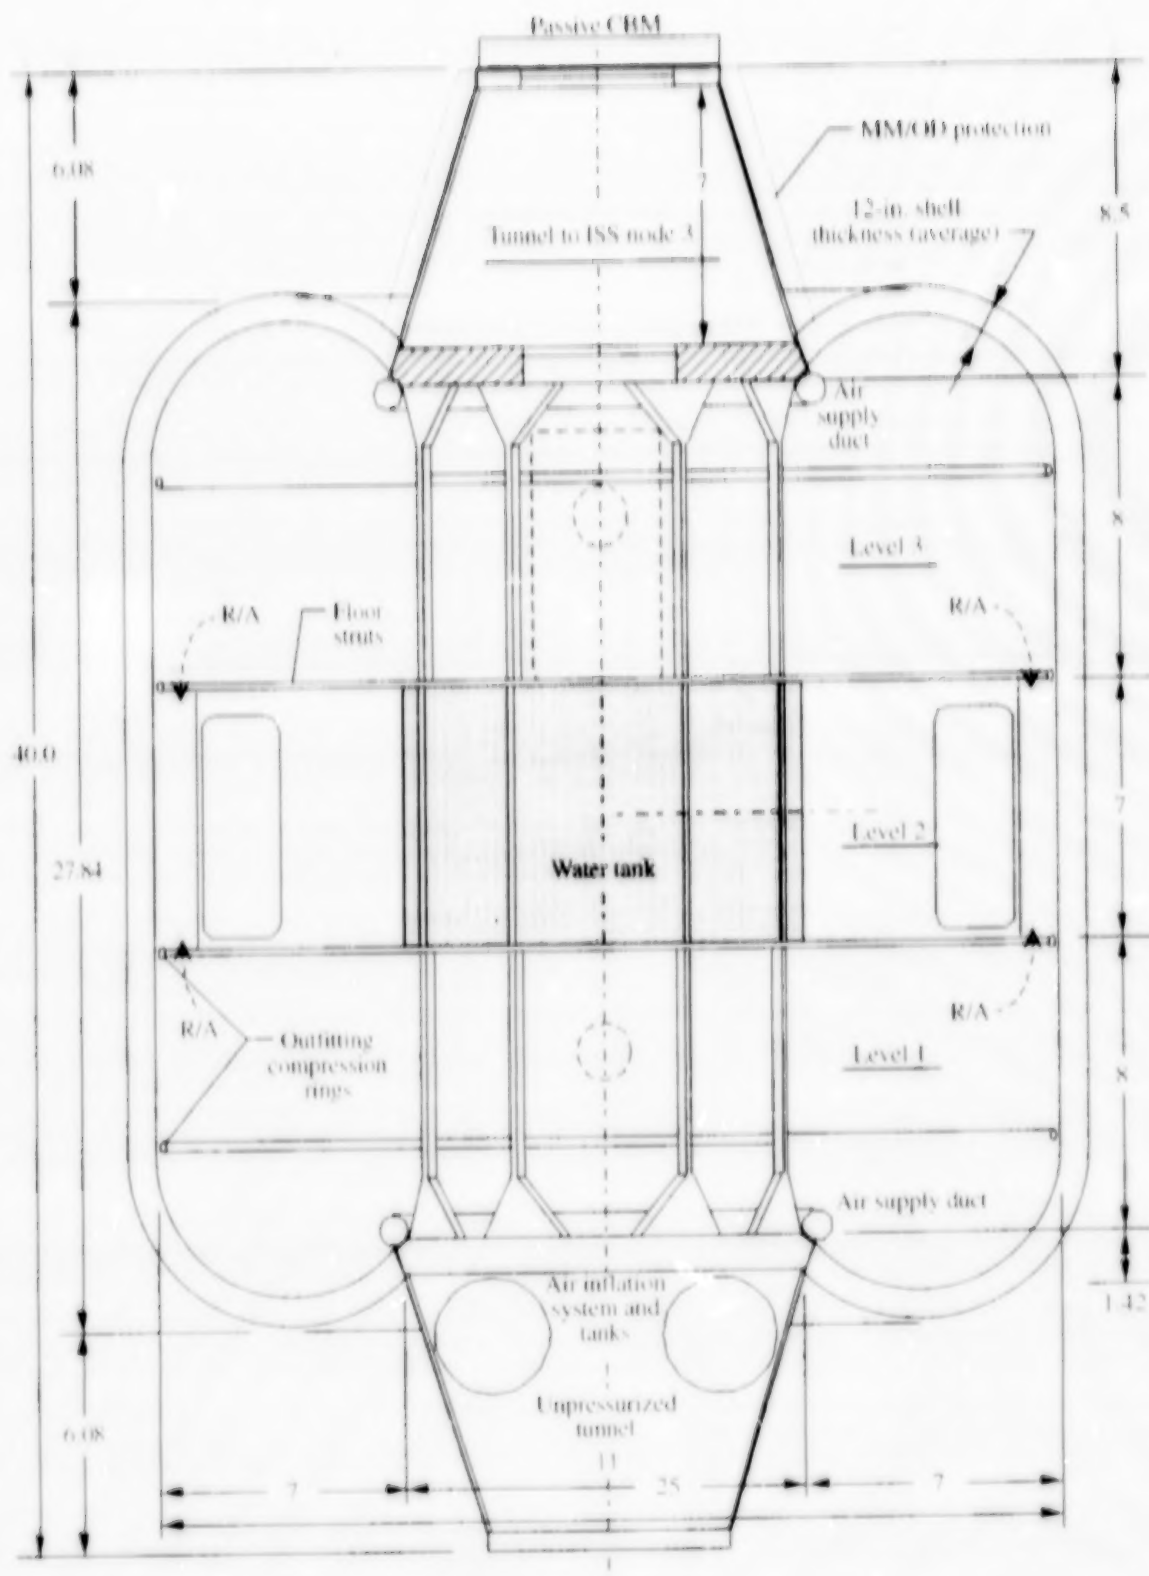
TransHab cross section. Dimensions are in feet. (Truss sections, radiators, and solar arrays are not shown.)
